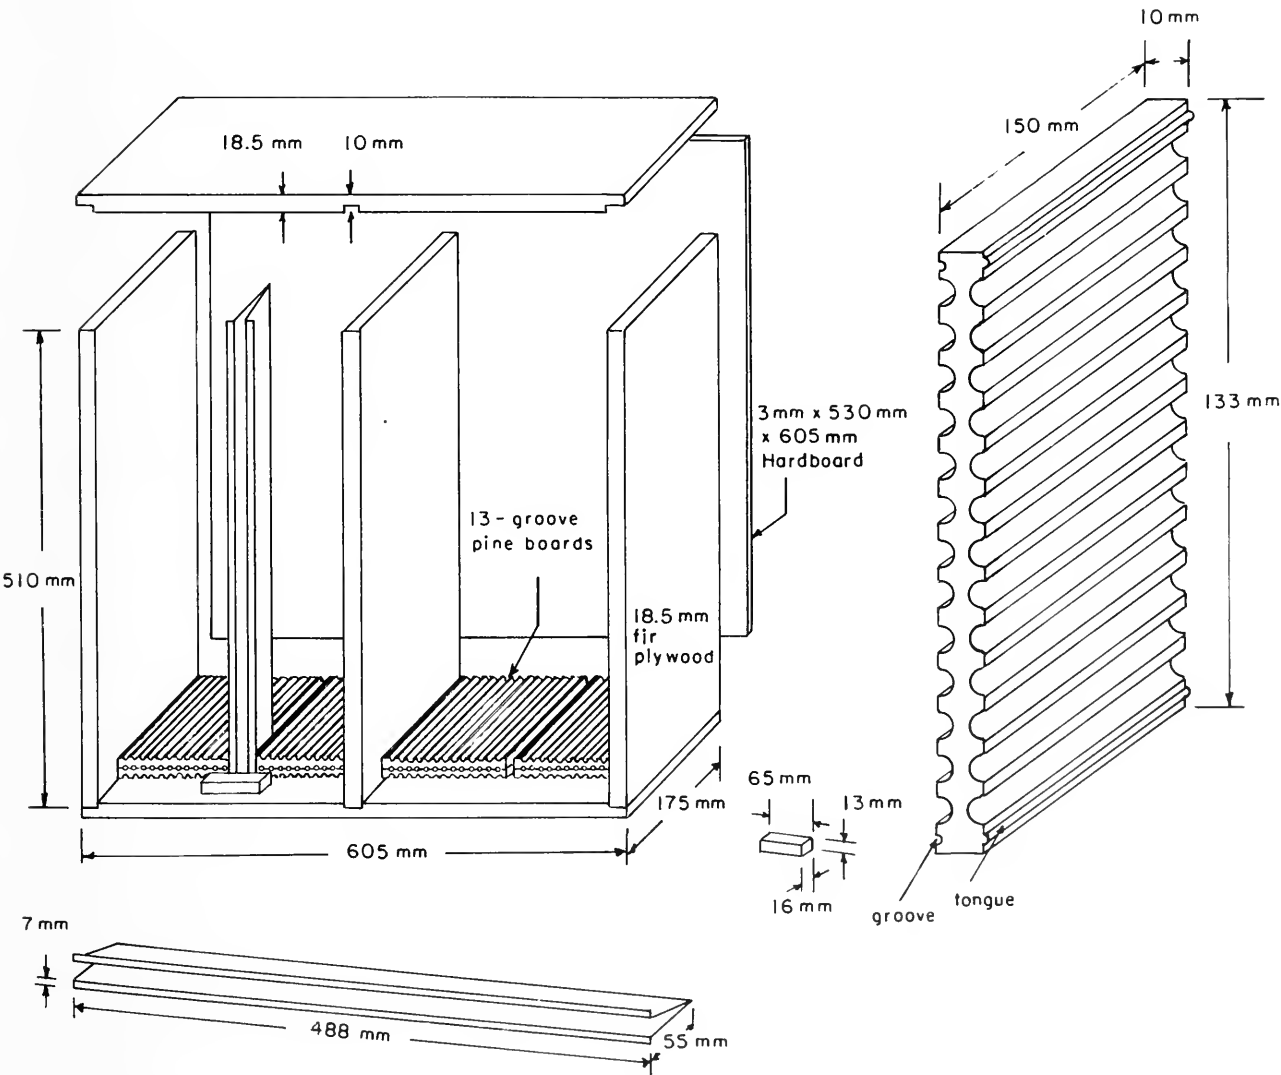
Plan for a hive made with 13-tunnel pine boards and a metal divider.
